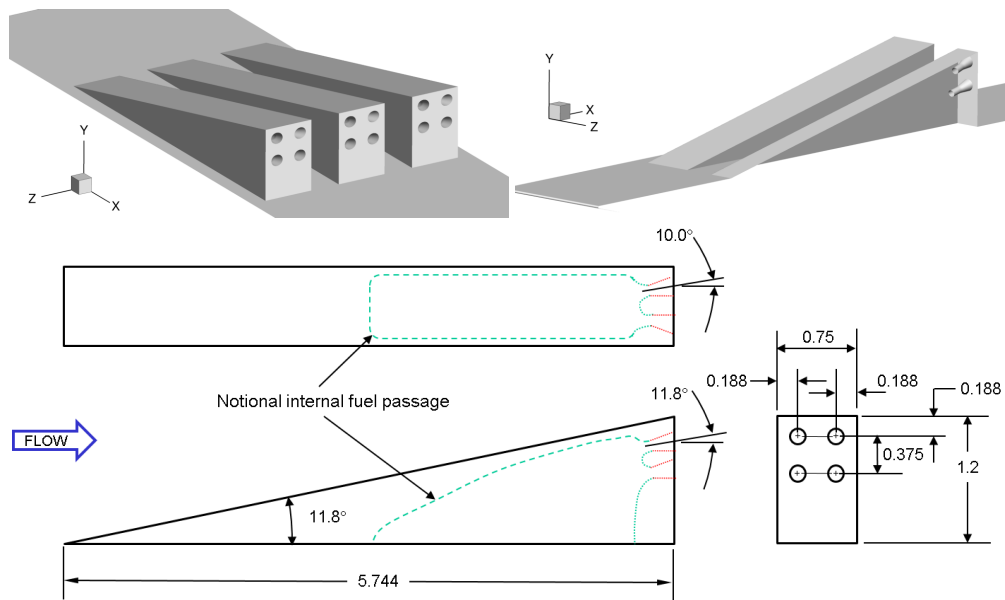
Isometric views and dimensional details of the baseline ramp injector (dimensions are in inches).
